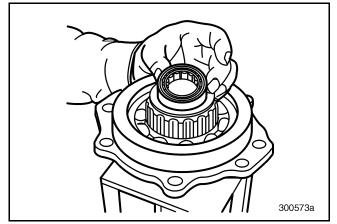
Spigot Bearing Removed from Main Drive Pinion Shaft
